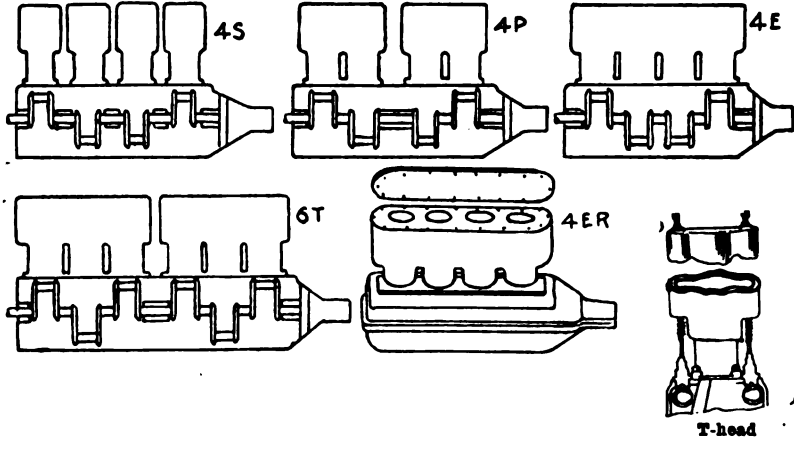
METHODS OF CYLINDER CASTINGS—Cylinders cast "singly" is illustrated at (4S). The crank shaft is a 180° with five bearings.
